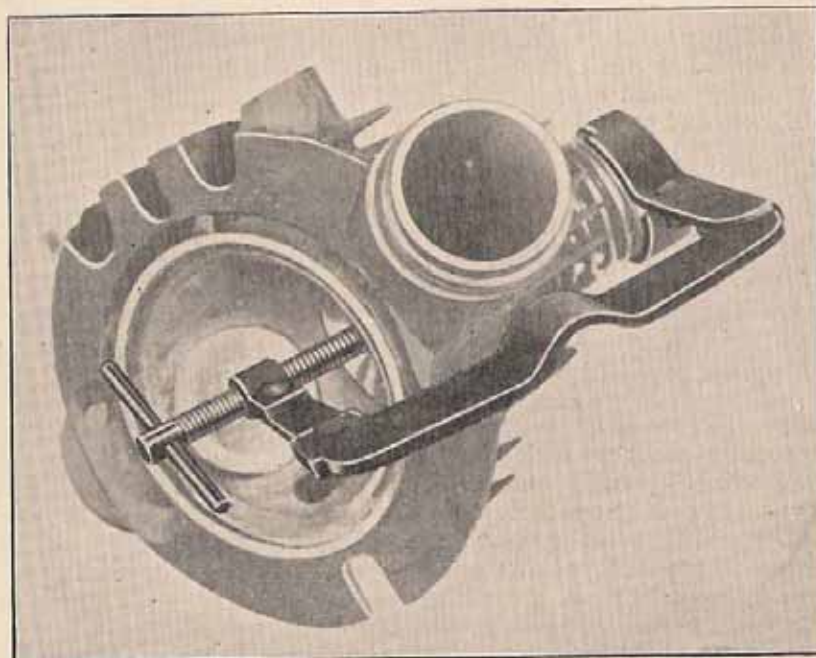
THE A.J.S. VALVE EXTRACTOR
